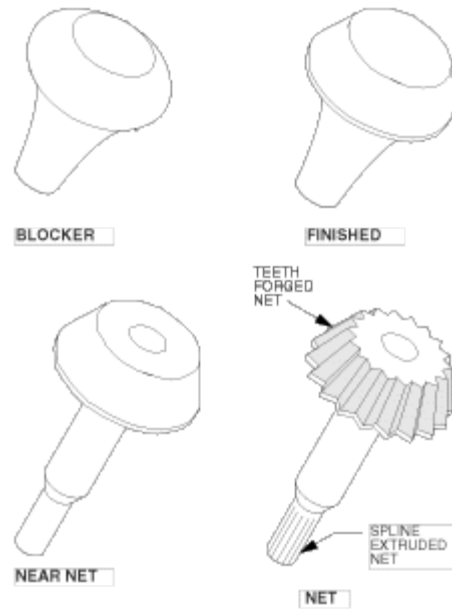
Blocker, finished, near-net and net shape forgings.
